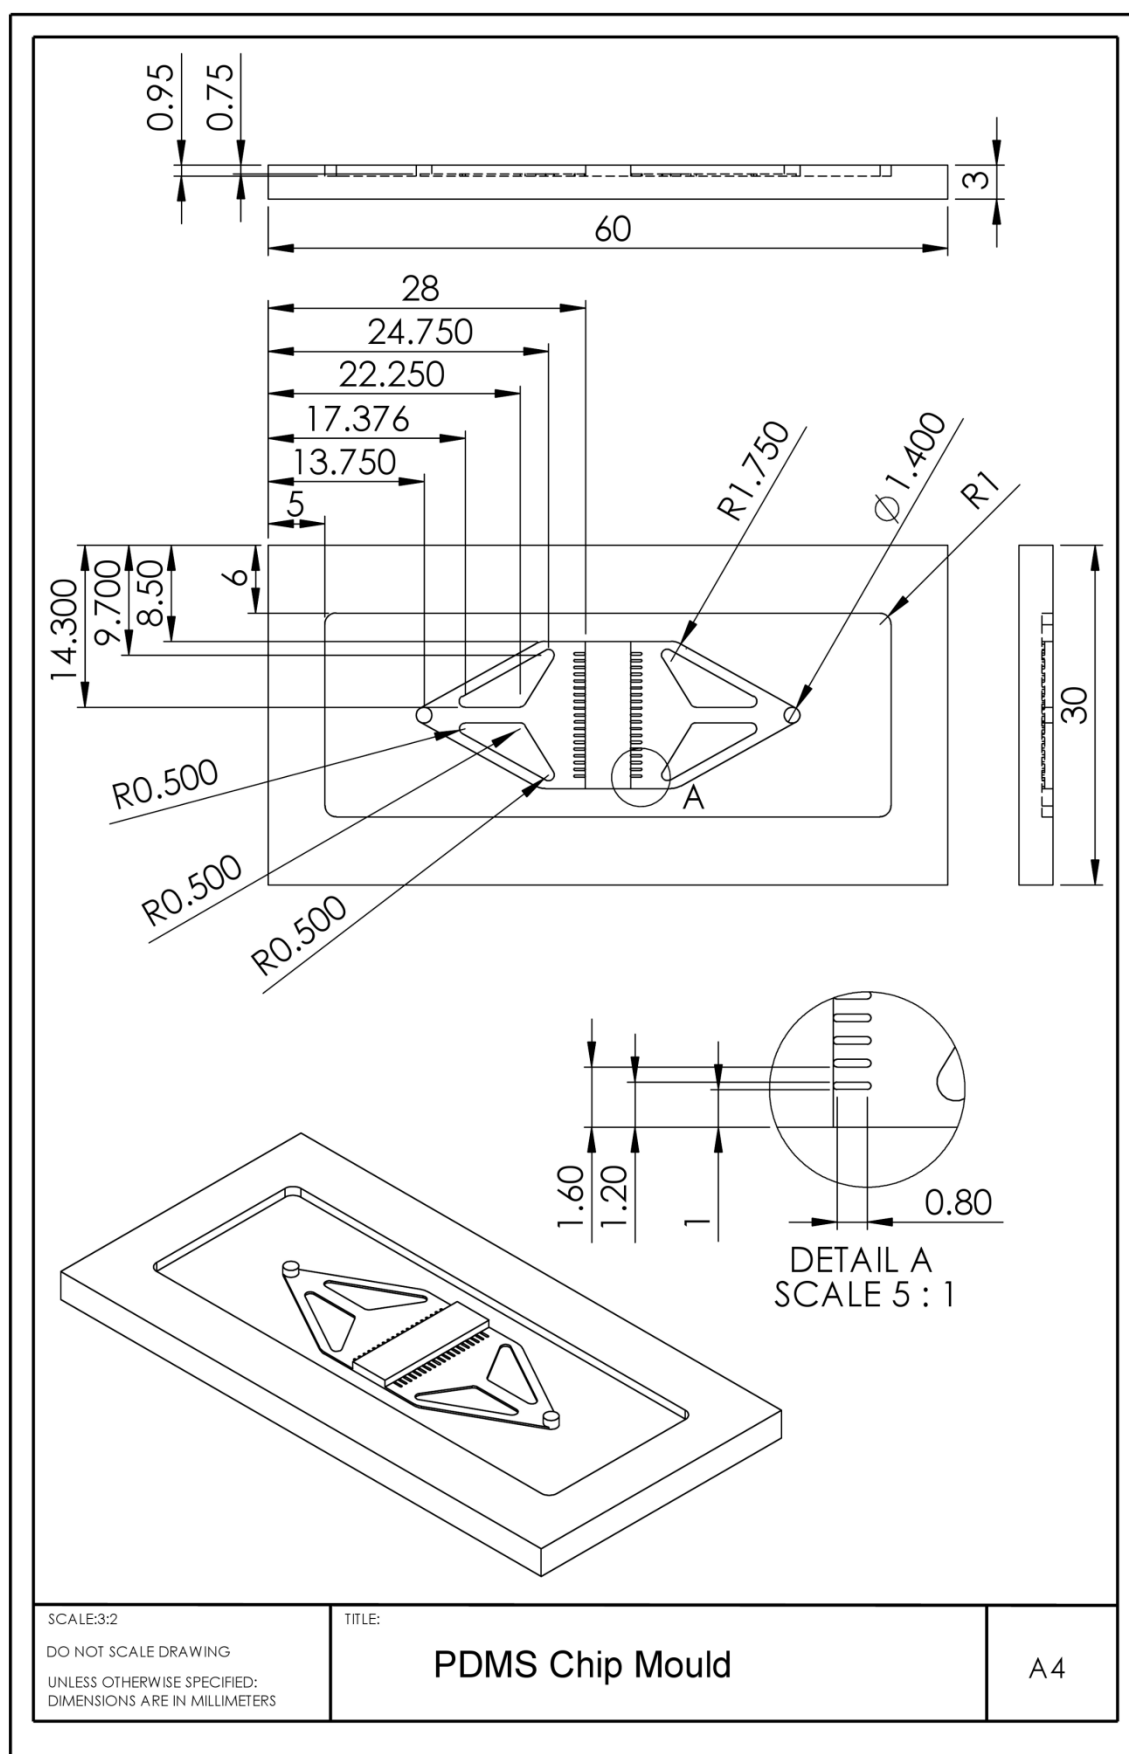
Technical drawing of prototype PDMS chip mould.
